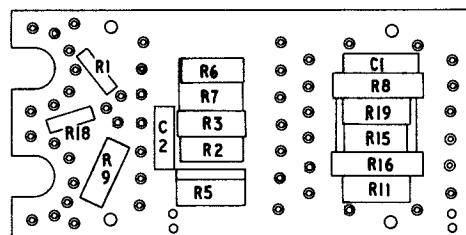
B. Sub Unit 3. Component location lowerside of board.
